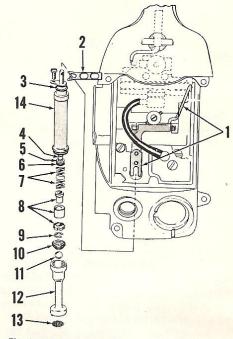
Exploded view of the manual chaln oiler pump. Early models use spring (10) and later models have special webbing in the housing to center check ball (11).
